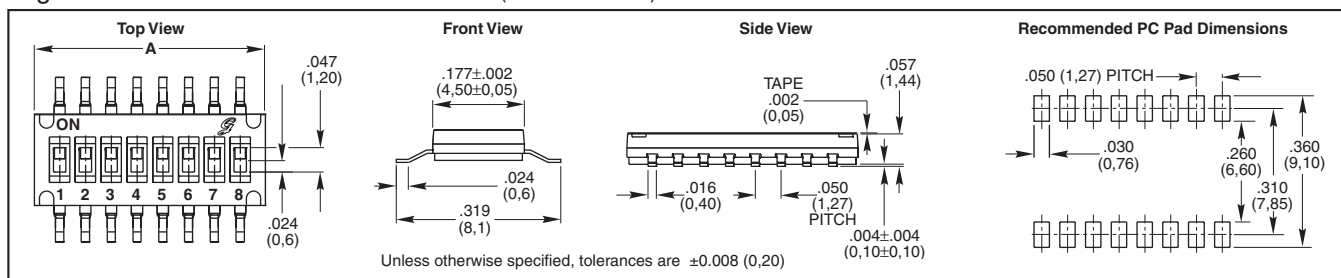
Series 97R DIMENSIONS In inches (and millimeters)
